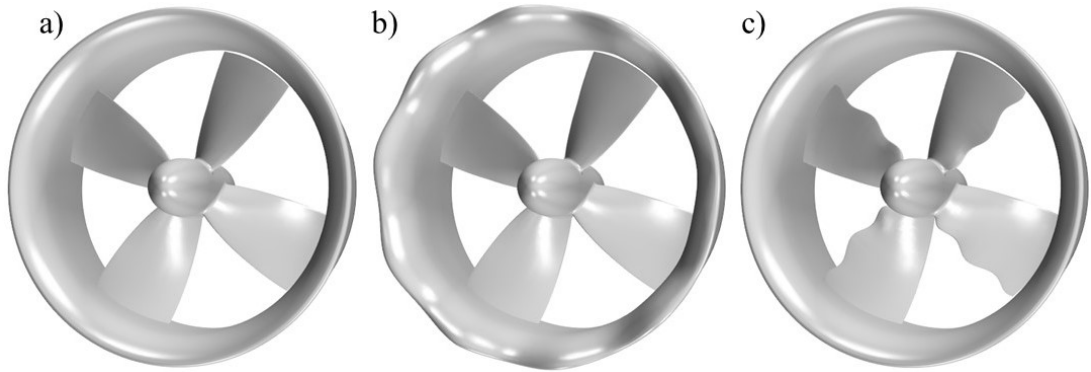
Geometry investigated a) REF, b) SLE (LE tubercle duct) and c) TUB, (LE tubercle ducted propeller blades)
